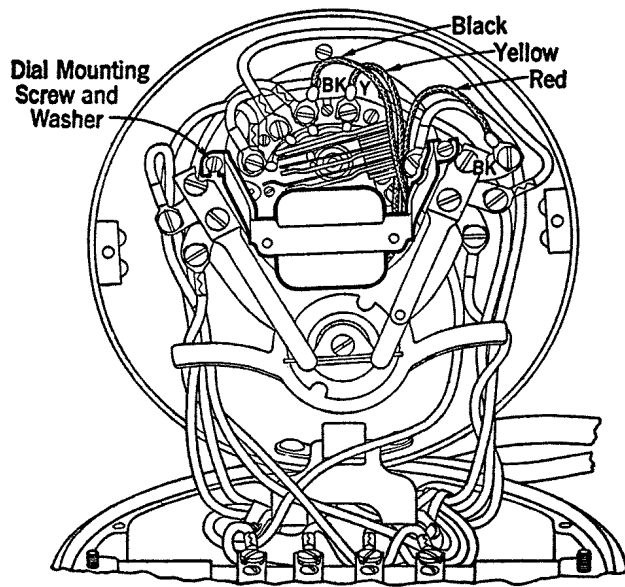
61G Filter Shown in C1 Hand Set Mounting
